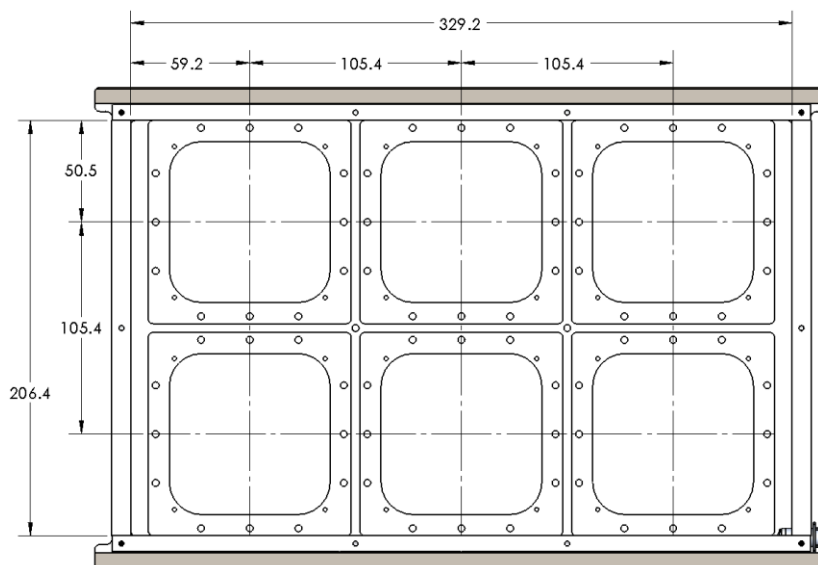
INTERNAL DIMENSIONS - TOP VIEW
